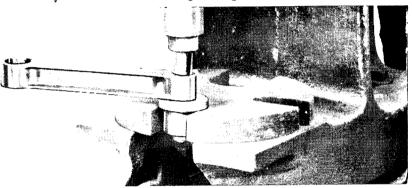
Checking Articulated Rod Bushing 36. CLEANING, INSPECTION, AND REPAIR.
